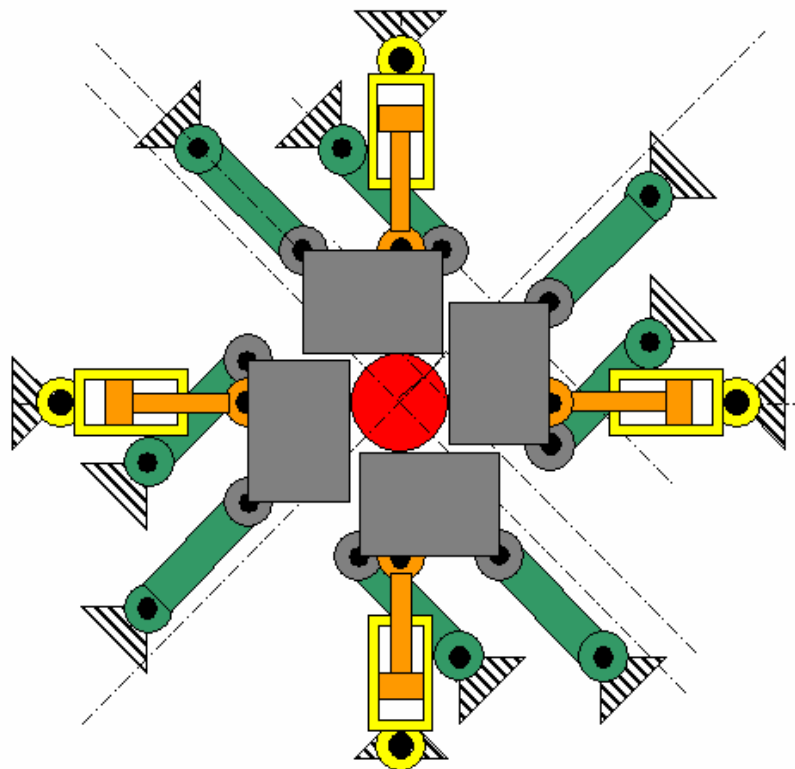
Kinematic scheme of new radial forging press (Option 1)
